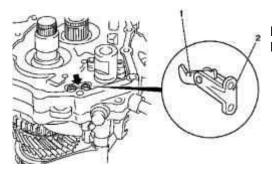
Removing the support bearing: 1 - Latch, 2 - bearing bearing
